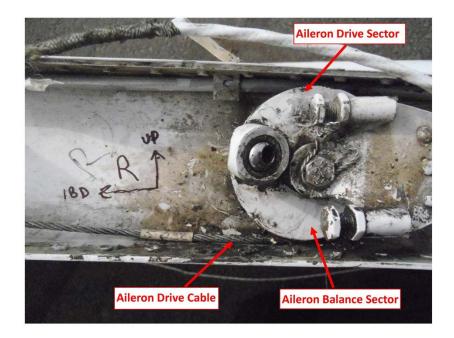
Right Wing Aileron Sector Wheel with Drive Cable in Balance Cable Location
